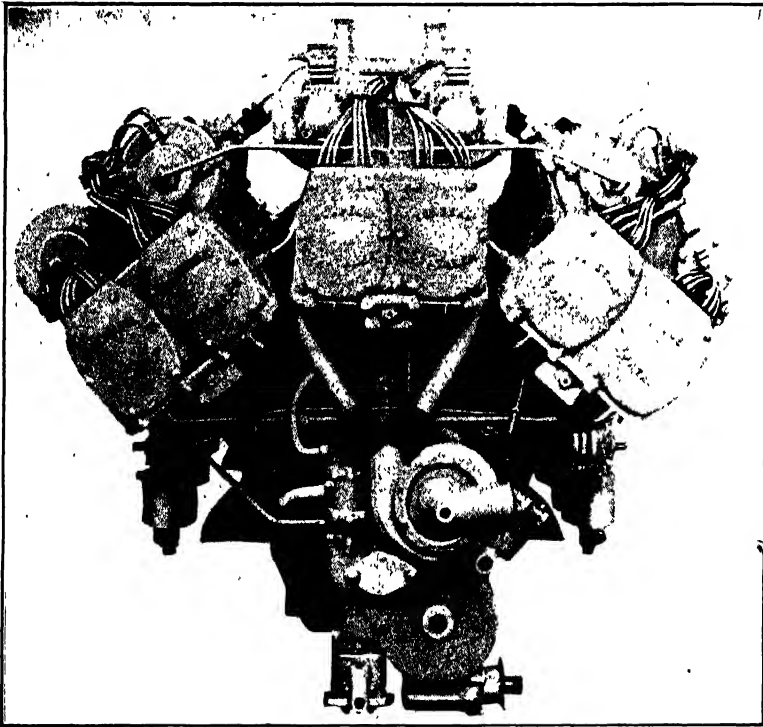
B.—Sunbeam Eighteen Cylinder Aircraft Motor Viewed from the Pump and Magneto End.
